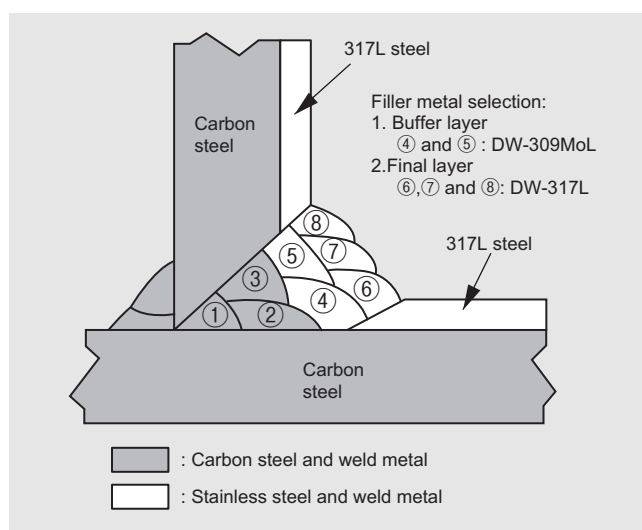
Typical pass sequence and FCWs of horizontal fillet welding of 317L cladding metal
